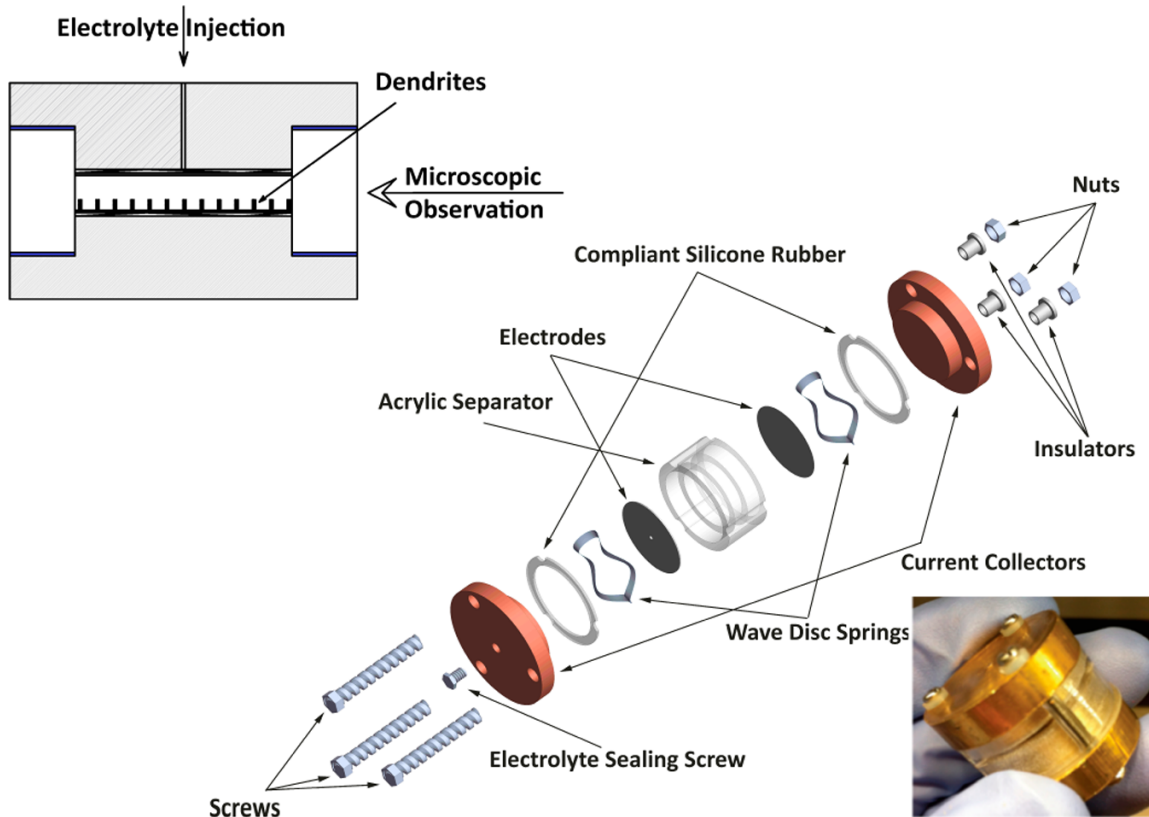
Top to bottom: cross section, exploded view, and physical appearance of the cell.
